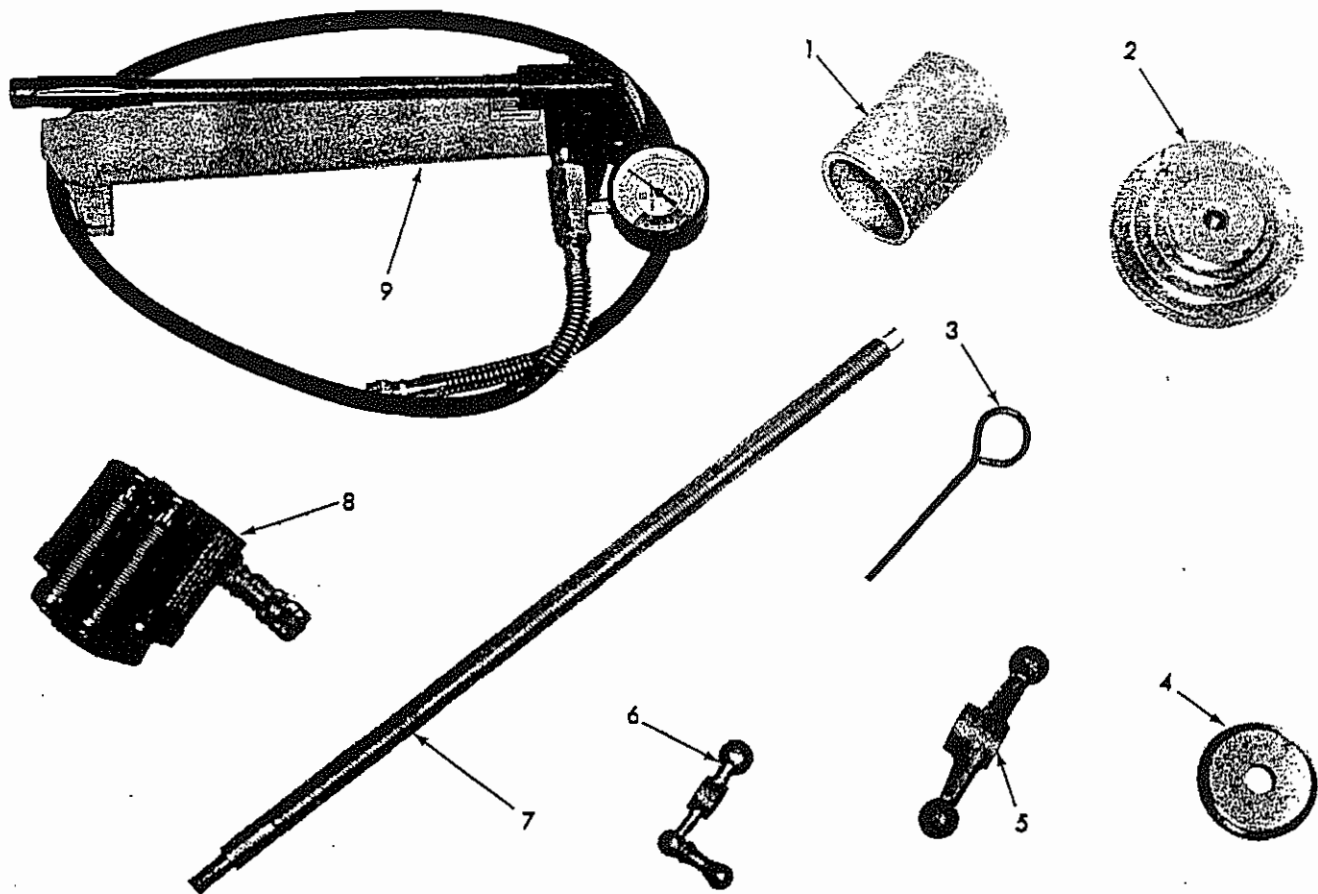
Service Tools (AC-300 Steering Clutch Set) For Disassembling and Assembling Steering Clutches (T-20865)
